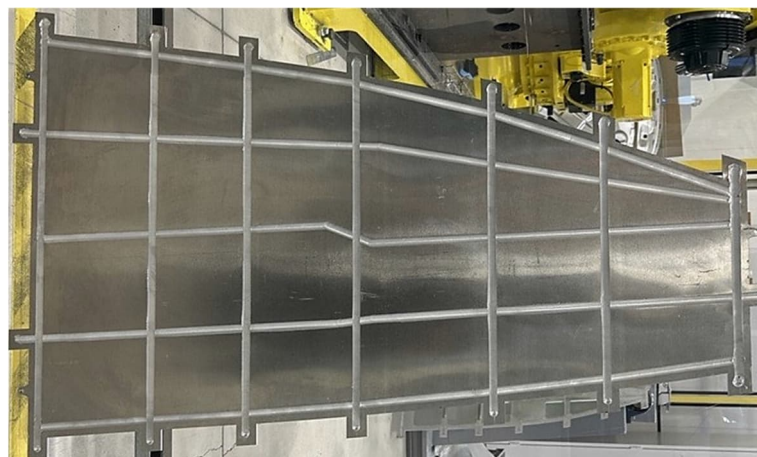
One of the FSW panels manufactured in the InteDemo project.
